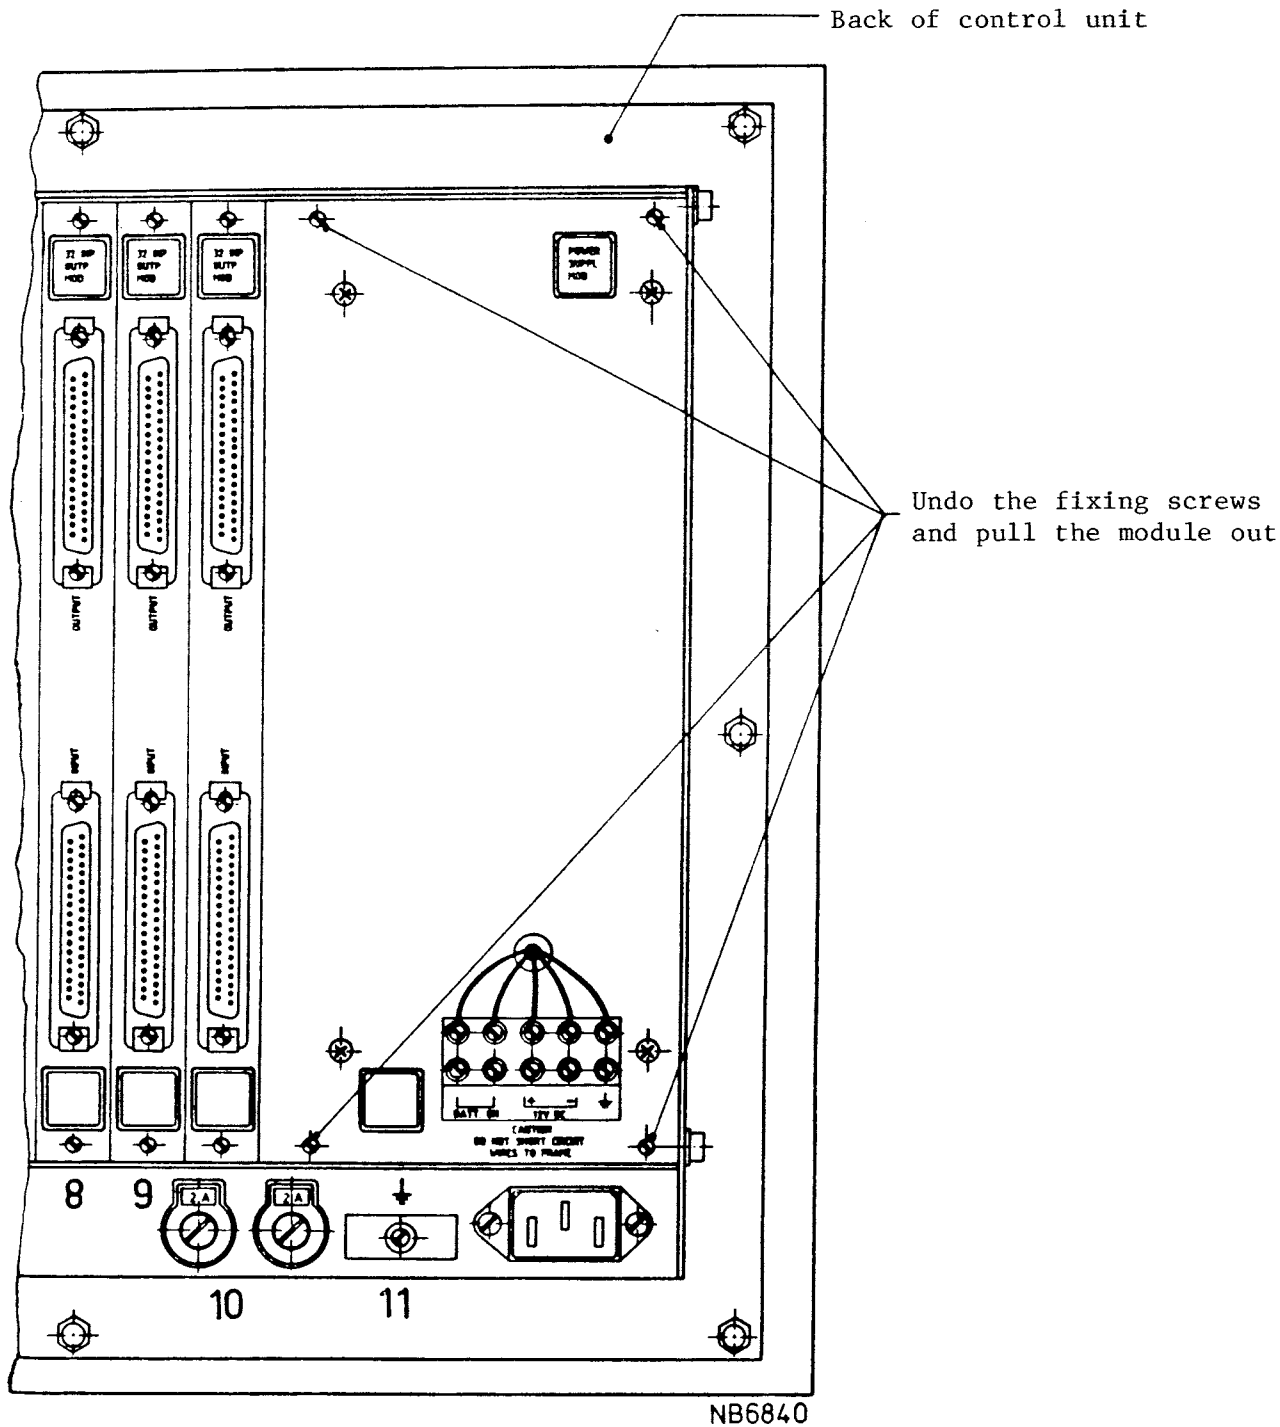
4 Detail of back of control unit showing power supply module (position 11) and fixing screws
